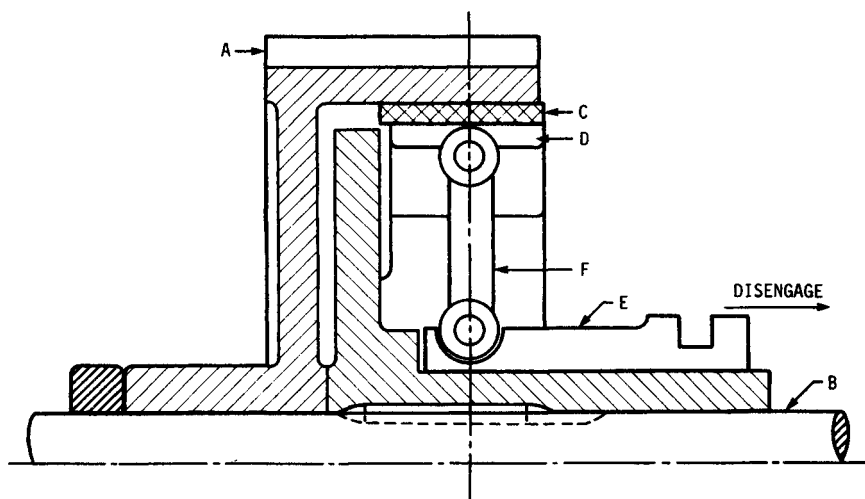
Schematic drawing of a radial clutch built within a gear; *A*, gear, the driving member; *B*, driven shaft; *C*, friction plate; *D*, pressure plate; *E*, movable sleeve; *F*, toggle link. This type of clutch can also be made within a V-belt sheave.
